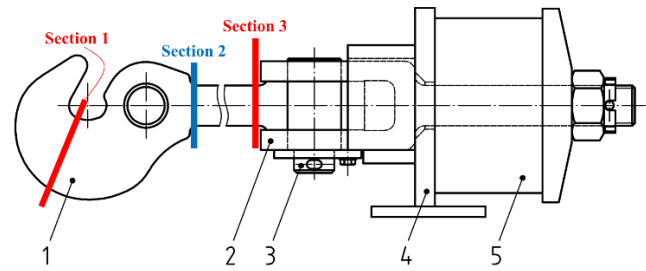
Draw gear components: 1 - draw hook; 2 - drawbar; 3 - joint pin; 4 - support plate and 5 - elastic device [7]
